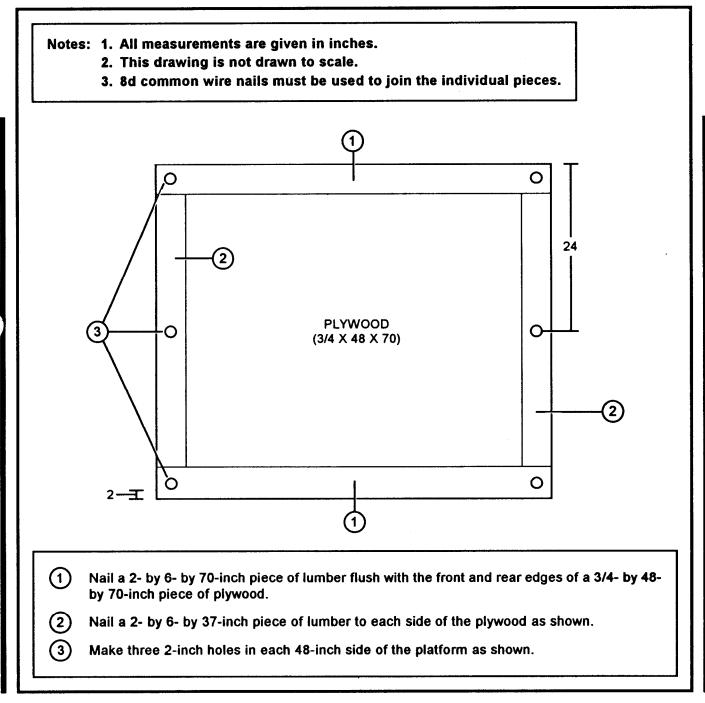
Parachute stowage platform constructed and cargo parachutes stowed
